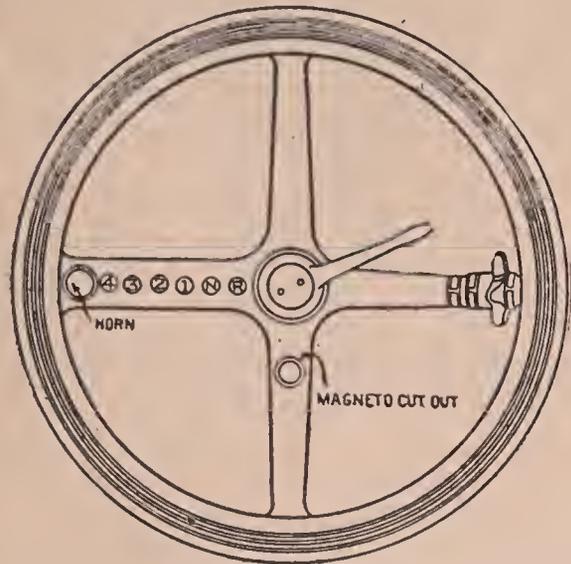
The Steering Wheel of the S G V Car, Showing How the Electric Gearshift Is Operated on That Make.
